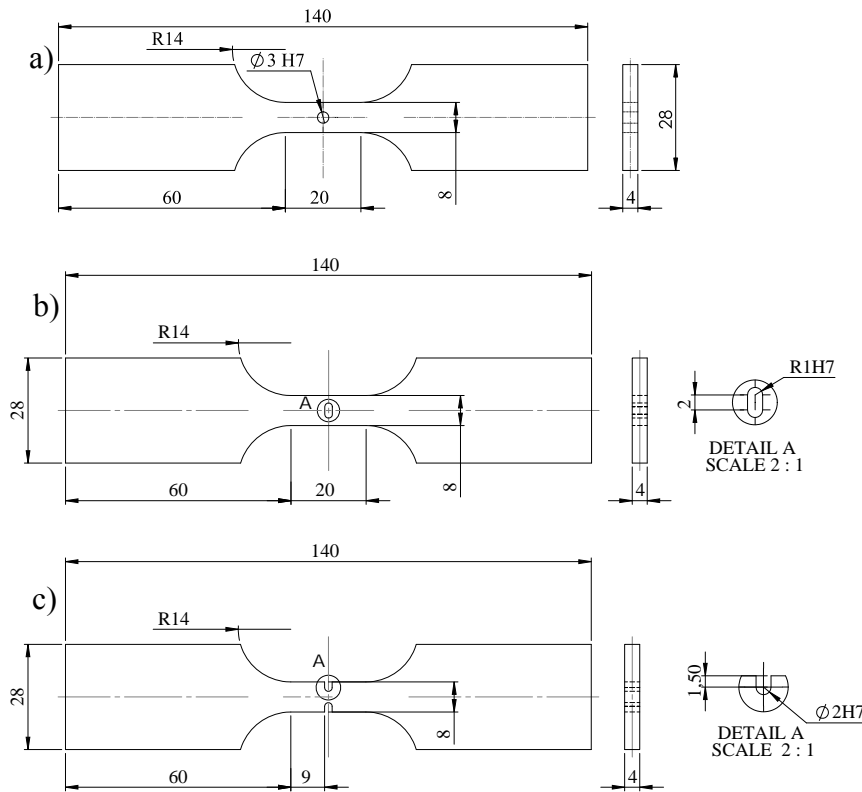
Notched plane specimens' geometries of X65 piping steel: a) central circular hole (X65_CH); b) central oval hole (X65_OH); c) side notch (X65_SN).
